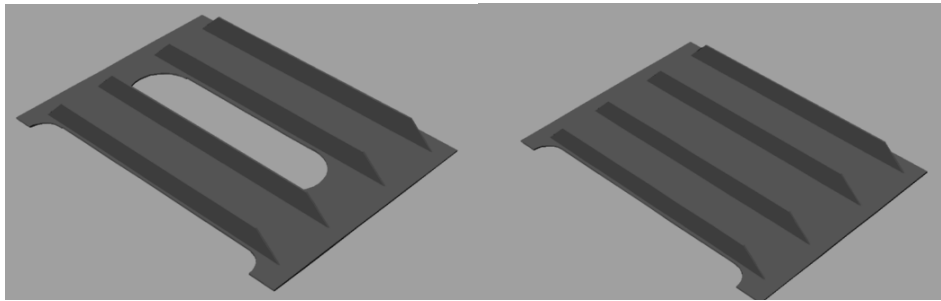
Sketch of typical production parts that were welded using the inverse process model.
